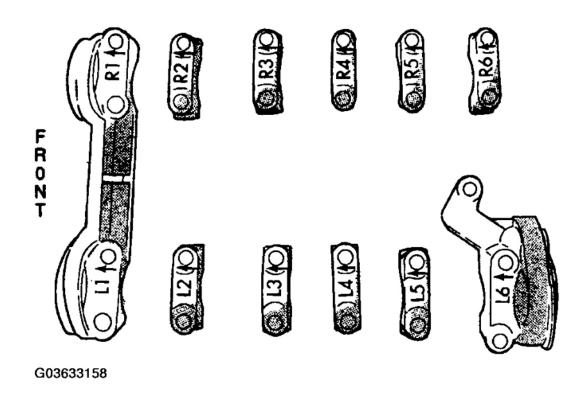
Identifying Camshaft Bearing Cap Identification Courtesy of DAIMLERCHRYSLER CORP.
